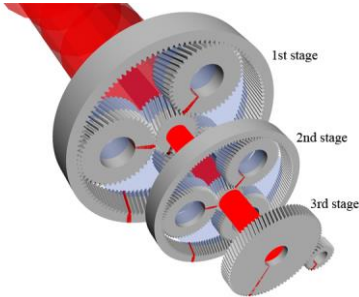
Three-stage gearbox for 5MW wind turbine.
